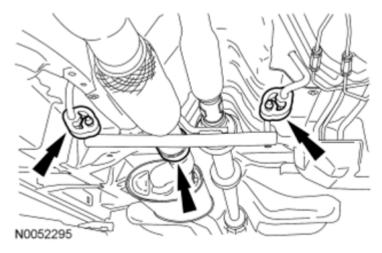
Locating Exhaust Flexible Pipe Clamp Courtesy of FORD MOTOR CO.
